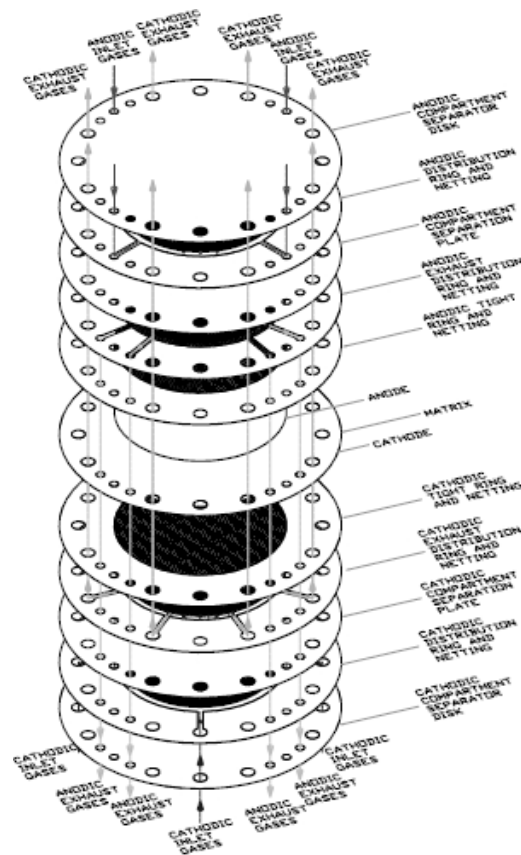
Exploded view of a cylindrical molten carbonate fuel cell in a stack [95].
